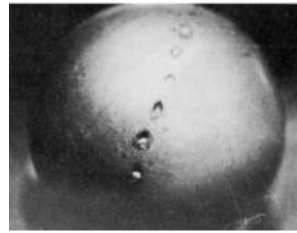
PITTING DAMAGE DUE TO BEARING CURRENT DISCHARGE [49]
